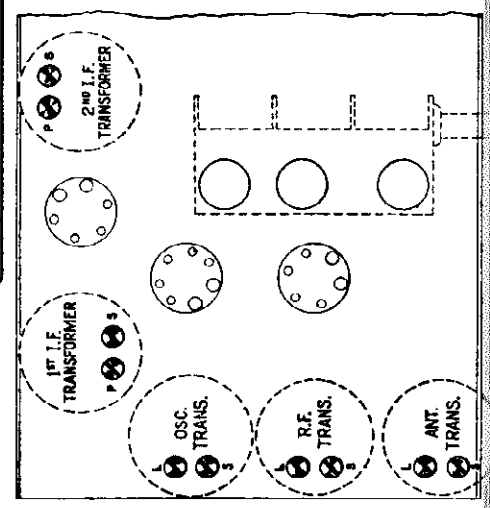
Location of Line-up Capacitors—Viewing bottom of chassis
